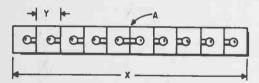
Drawing shows division of indicator box; table gives proportionate dimensions.
